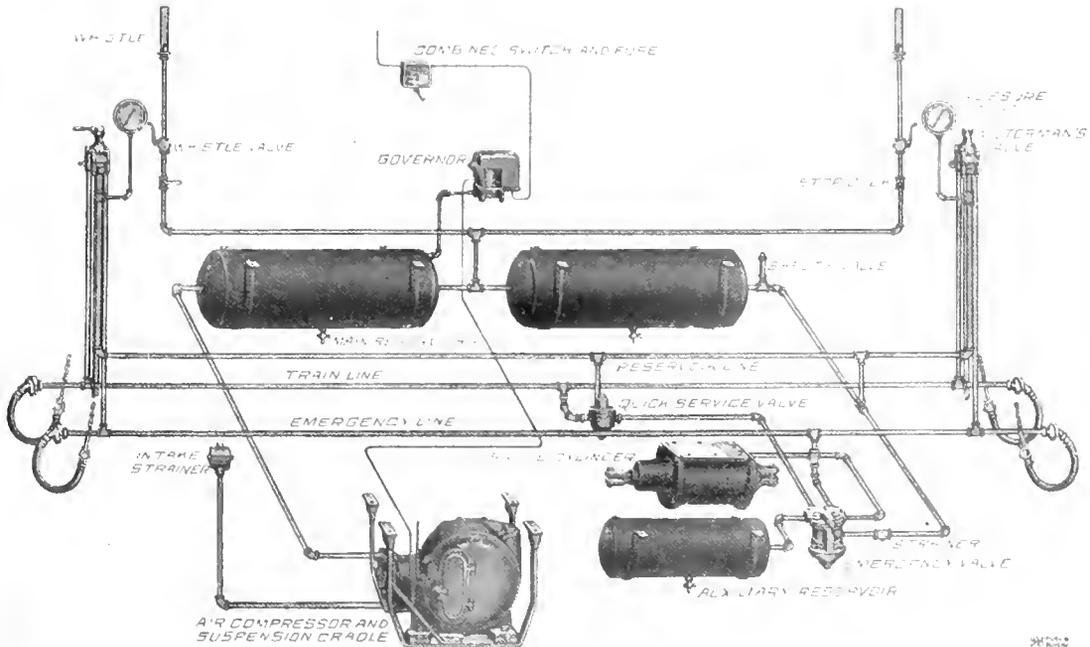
Emergency Straight Air Brake Equipment for Motor Car
